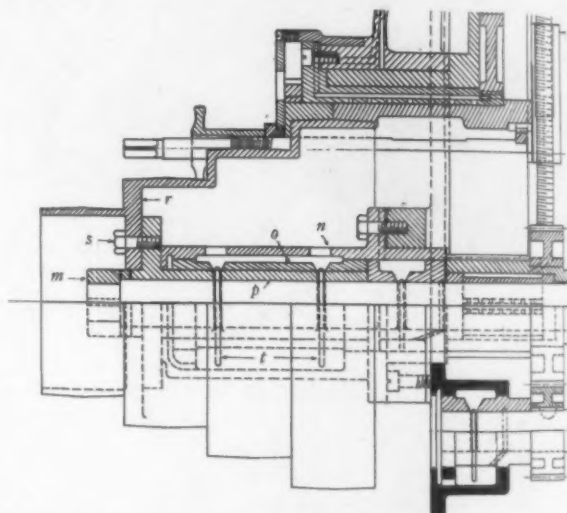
Details of the Driving Mechanism of the Stockbridge Shaper
